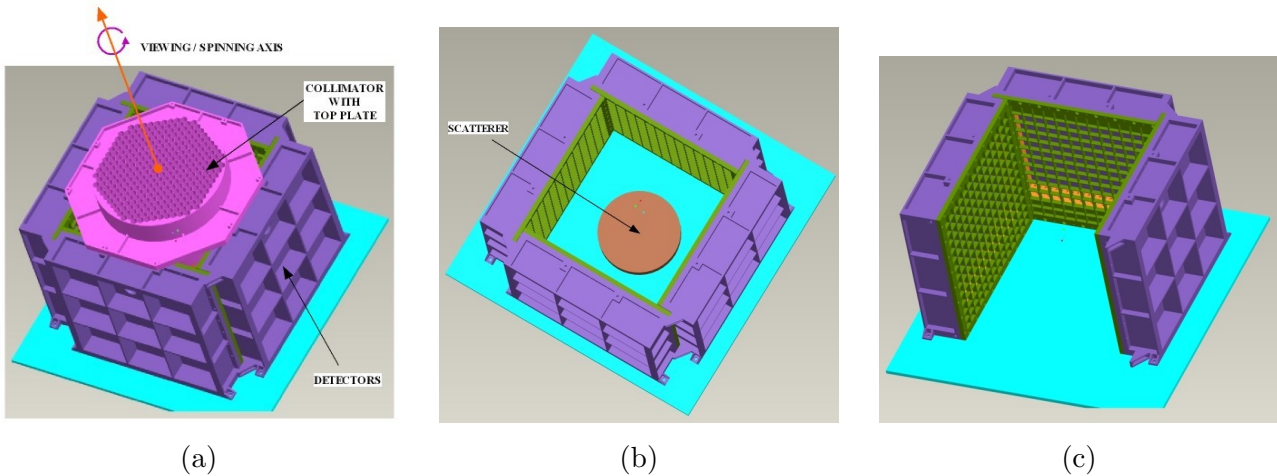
Design and Components of POLIX. Figure (a) shows the complete design with collimator on top and the rotation axis of instrument. Figure (b) shows the scatterer position. Figure (c) gives a view with one detector removed. It clearly shows the aluminium top-plate and the active volume (Yellow region behind the top-plate.). Image source : Polix Instrument Report, RRI, 2015.
